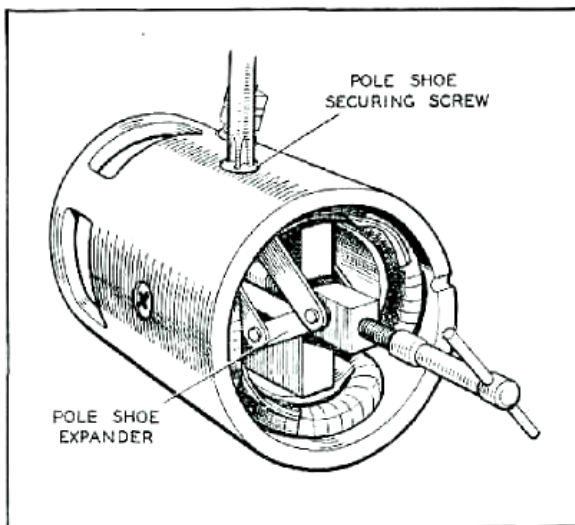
Tightening pole shoe retaining screws, using pole shoe expander.
